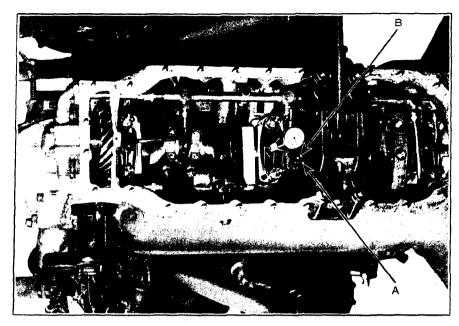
Determining Clearance in Crankshaft Main Bearings.
